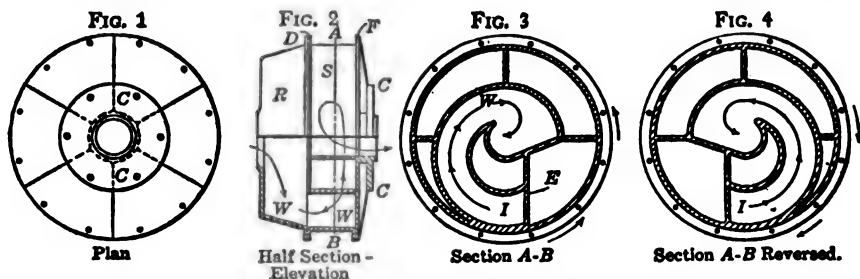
A REVERSIBLE TUBE-MILL FEEDER.
